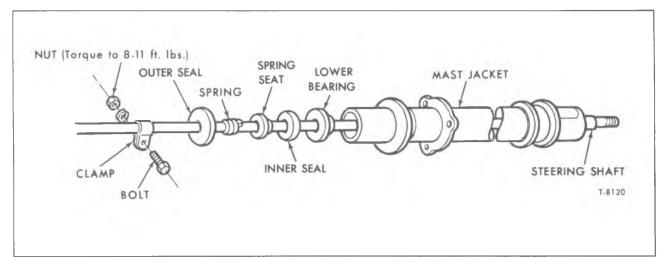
Steering Column Mast Jacket Components (Conventional Cab)
